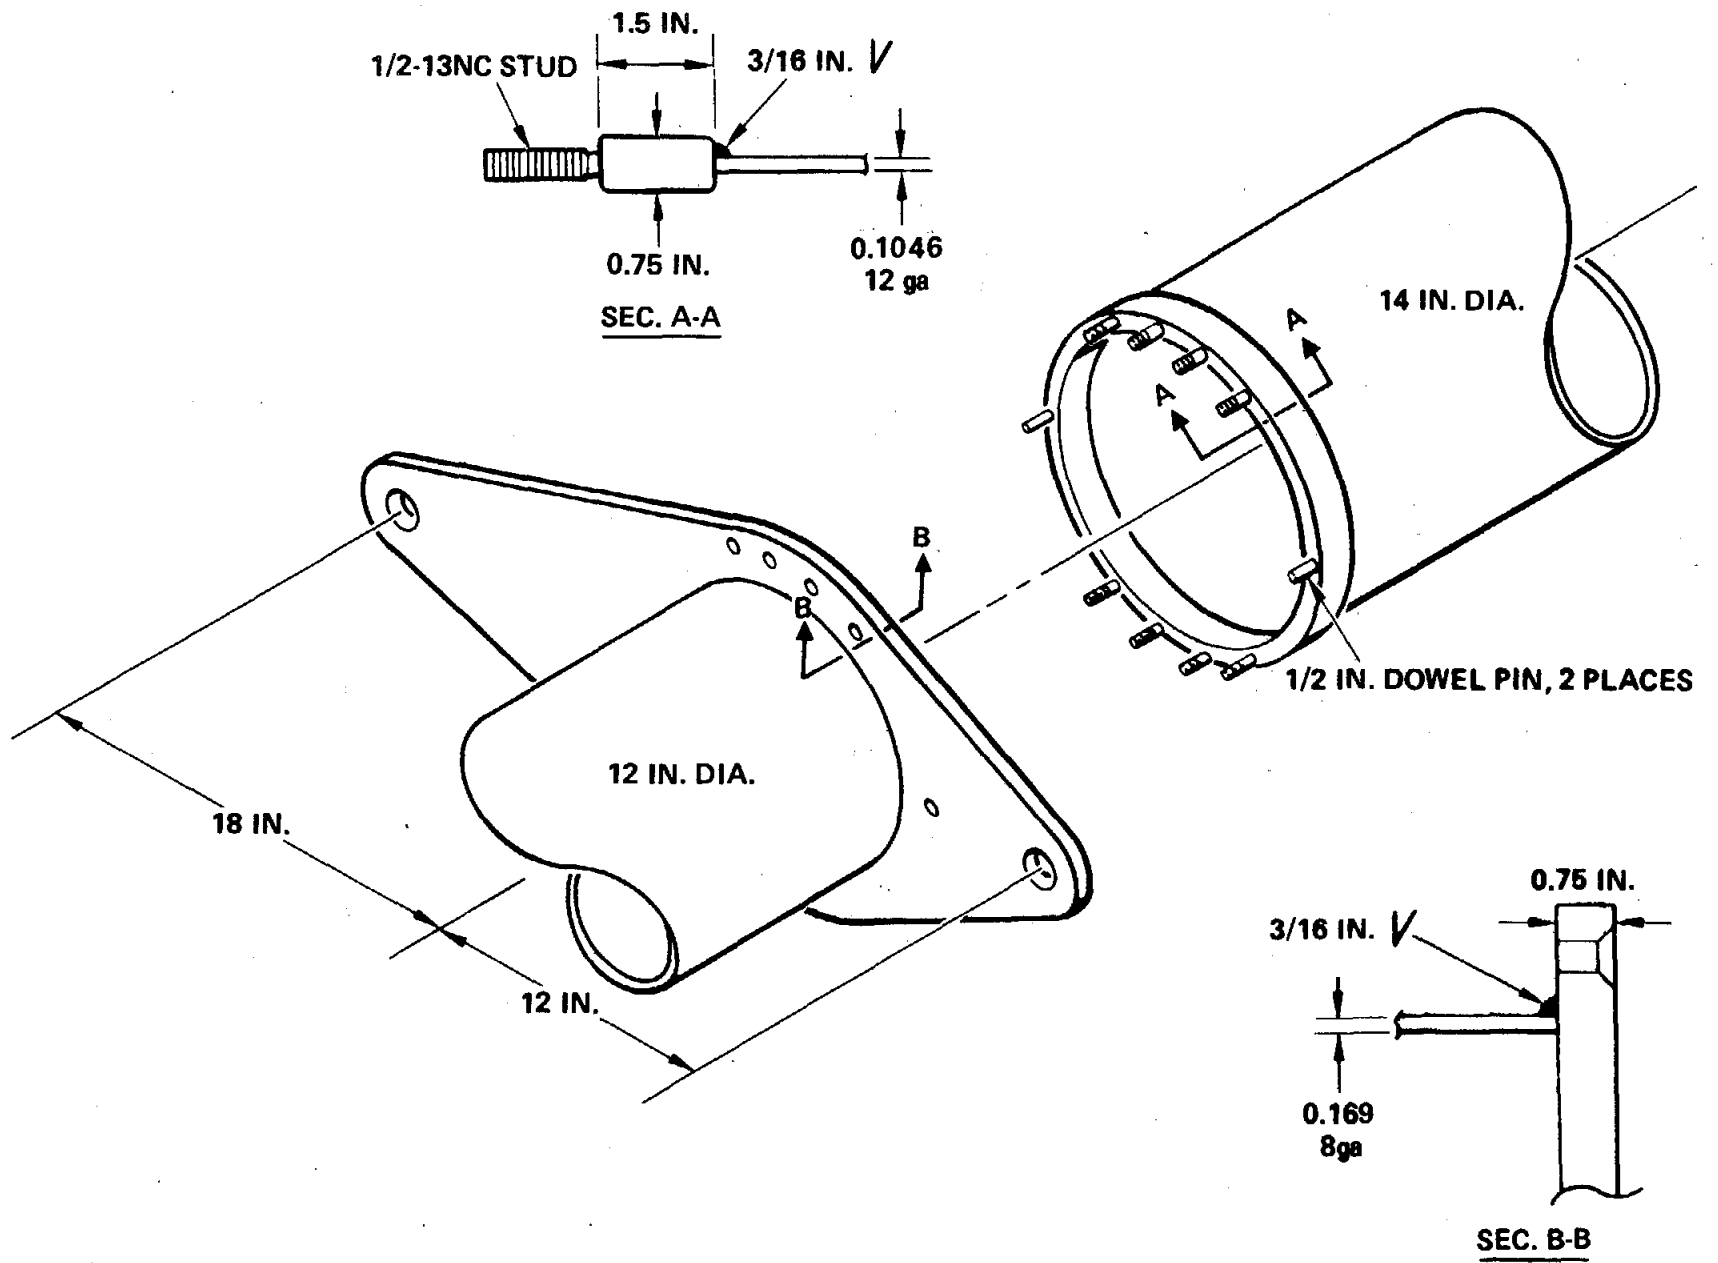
CENTER TORQUE TUBE AND FIELD JOINT
